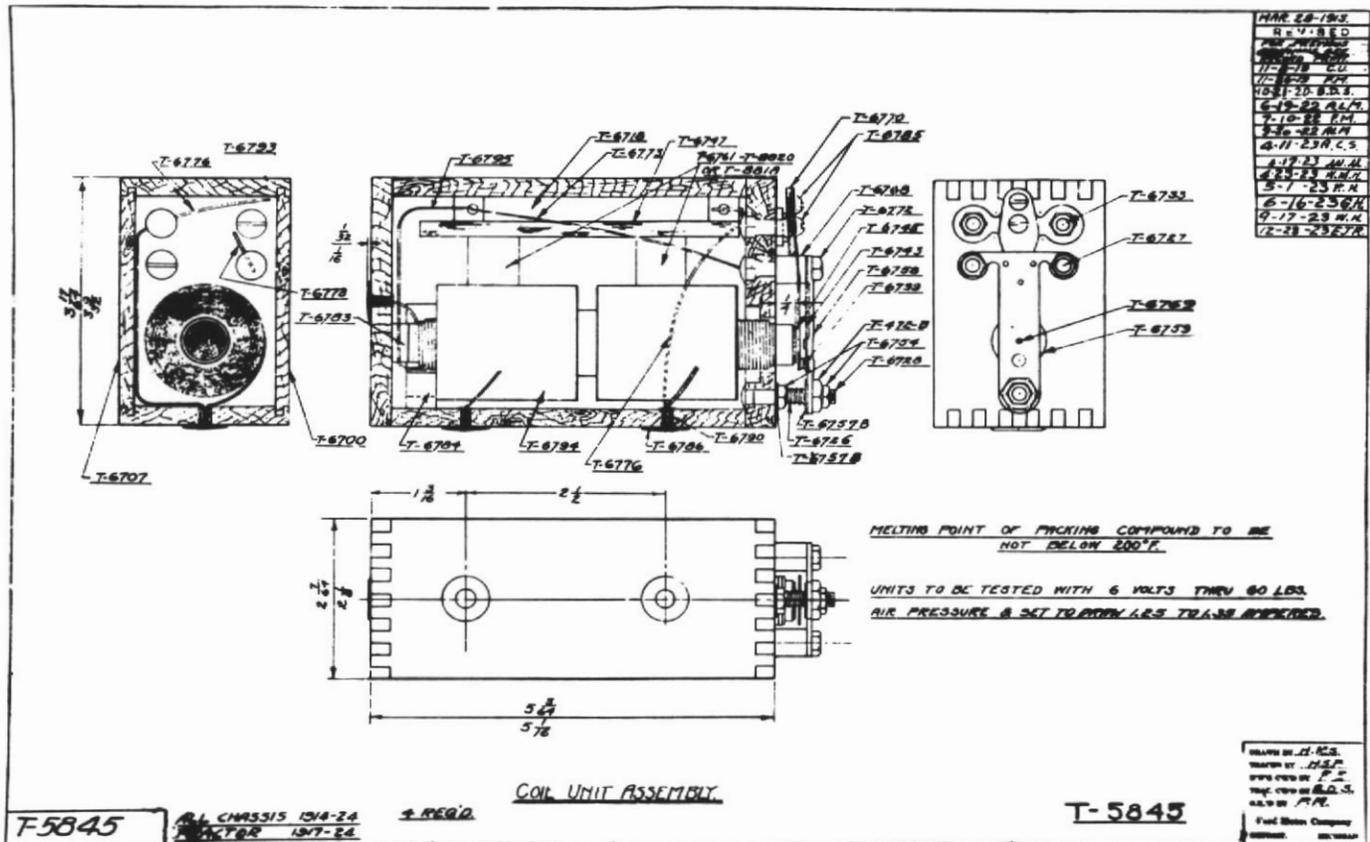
Engineering parts drawing for T-5845 - The Model T Coil Unit Assembly - dated December 28, 1923. From the collections of the Henry Ford Museum and Greenfield Village. Neg. No. T-5845.
